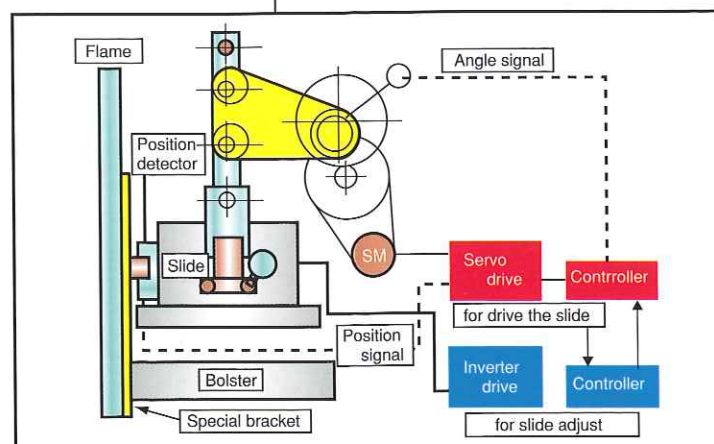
Basic structure of Crank shaft indirect drive system (link system)
